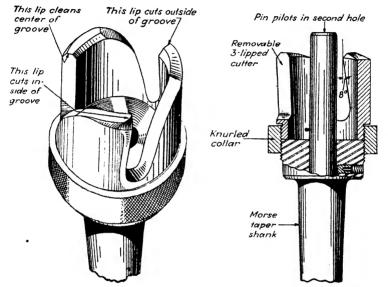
Three-lipped trepanning tool Fig. 45. Sectional view to show how used in Fig. 43.
